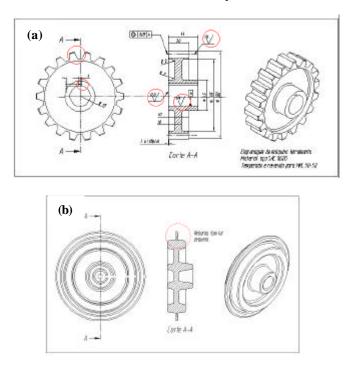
(a) Spur gear drawings and dimensions (b) hot forged spur gear.
